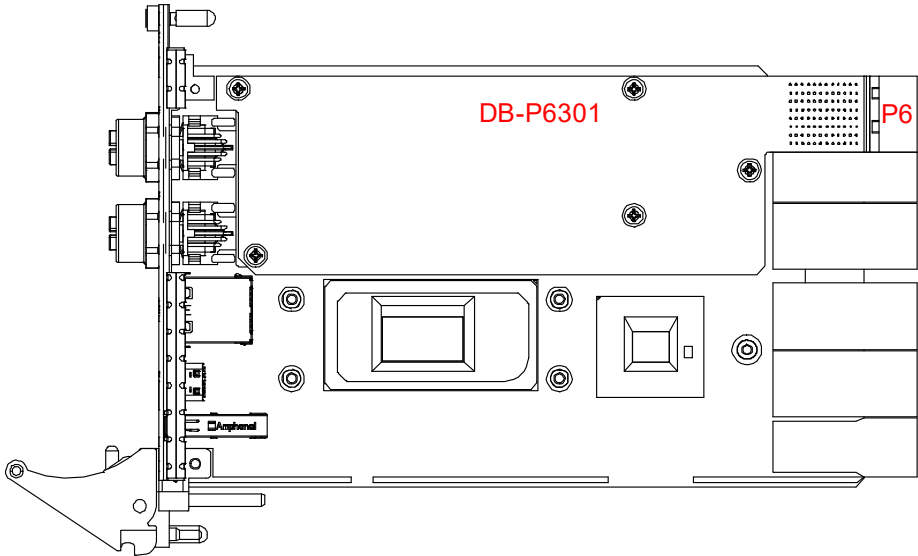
cPCI-A3535 4HP Blade Assembly Layout
